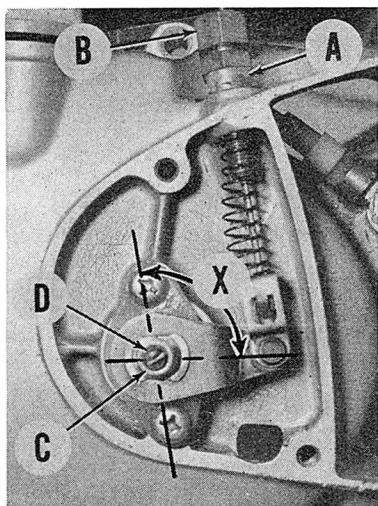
Turn cable adjuster (B) to obtain 90-100 degree angle (X). Refer to text for adjustment of screw (D).
